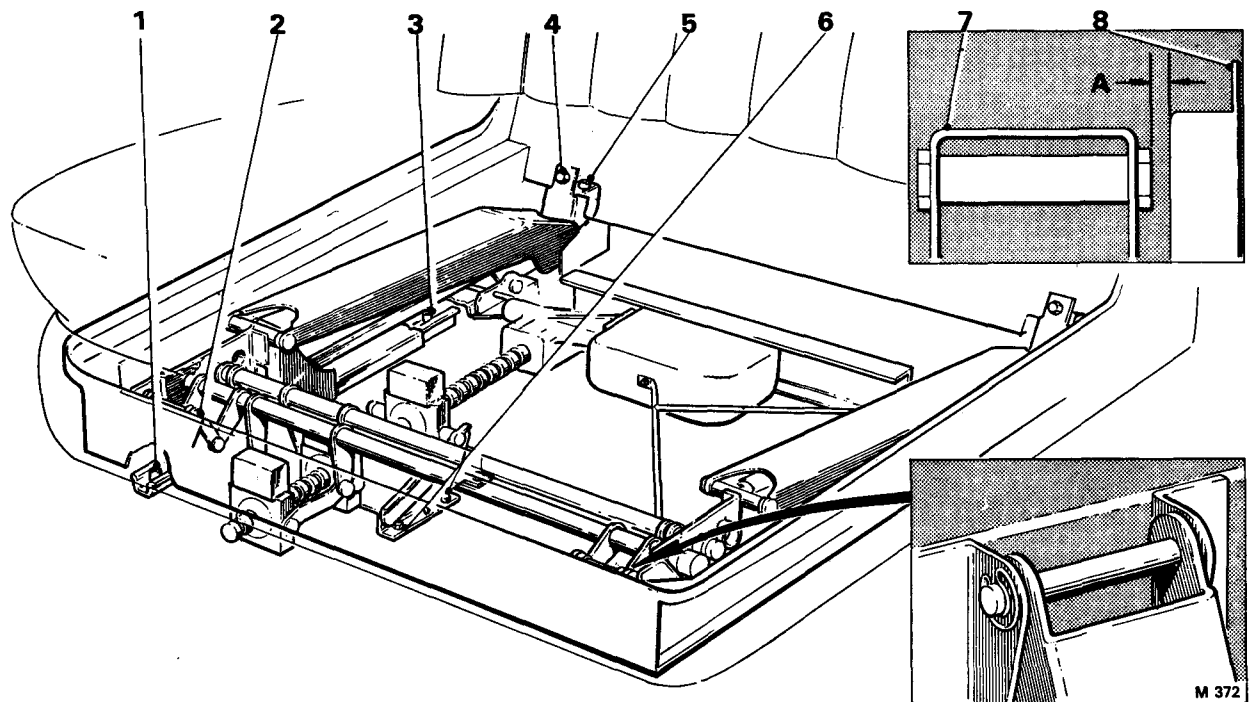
FRONT SEAT MECHANISM (4-Door Saloon and Long Wheelbase Cars after Car Serial Number 9617)
